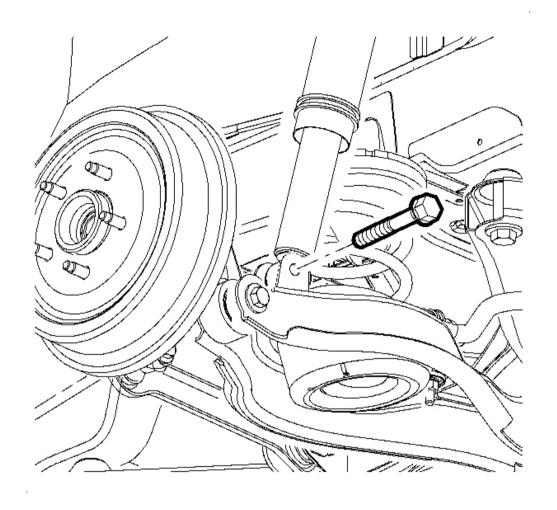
Shock & Lower Control Arm Courtesy of GENERAL MOTORS CORP.
